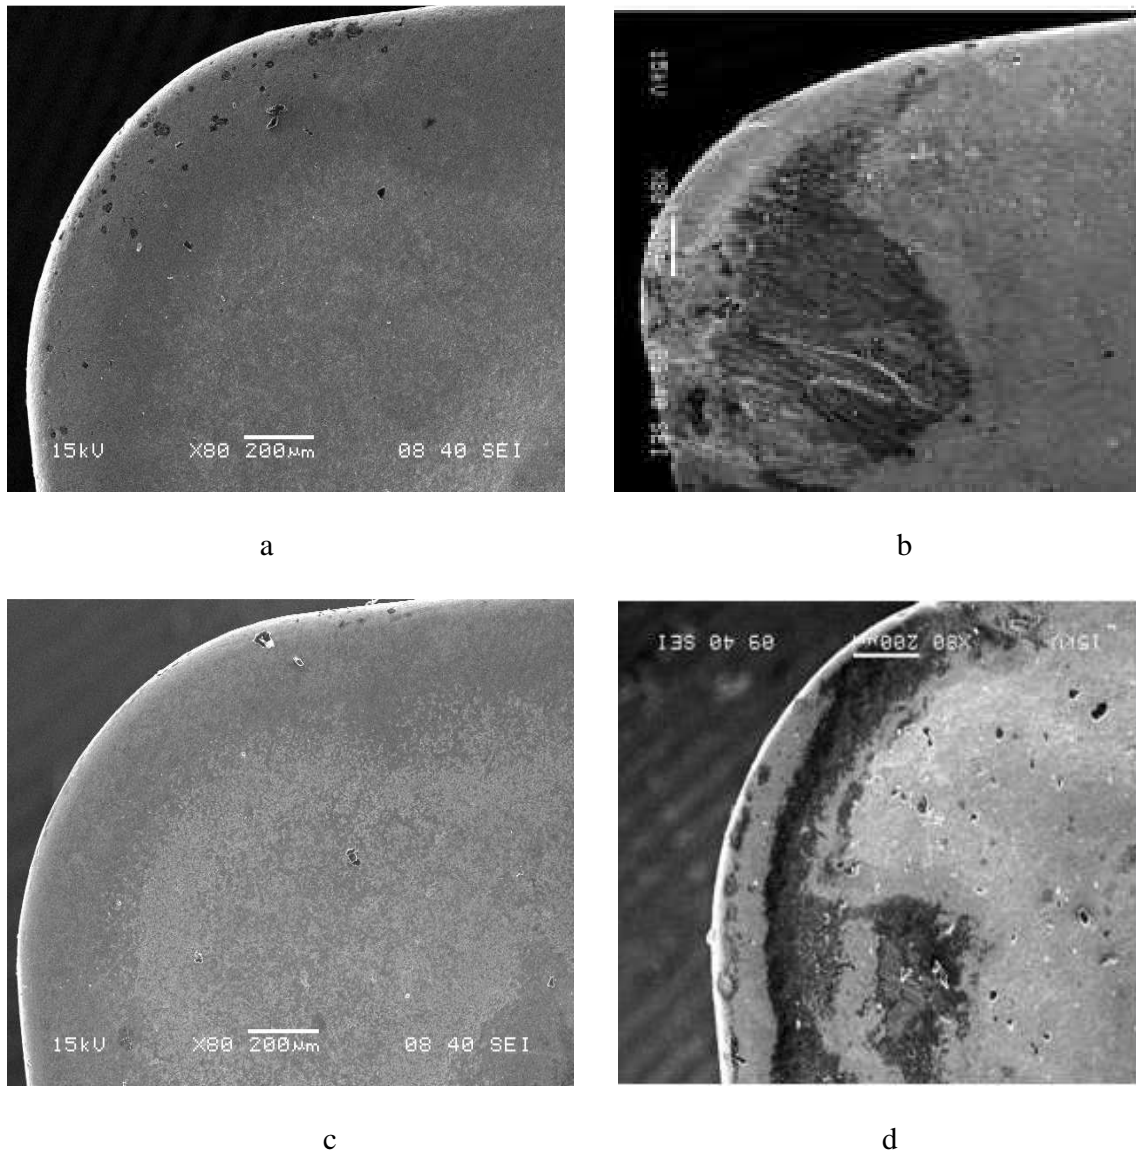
SEM Images of rake face of cemented carbide inserts (a) untreated (before machining), (b) untreated (after machining), (c) cryo treated (before machining), (d) cryo treated (after machining).
